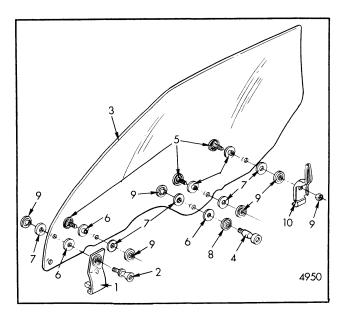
Front Door Window Assembly "A-37, 57 and 80" Styles
